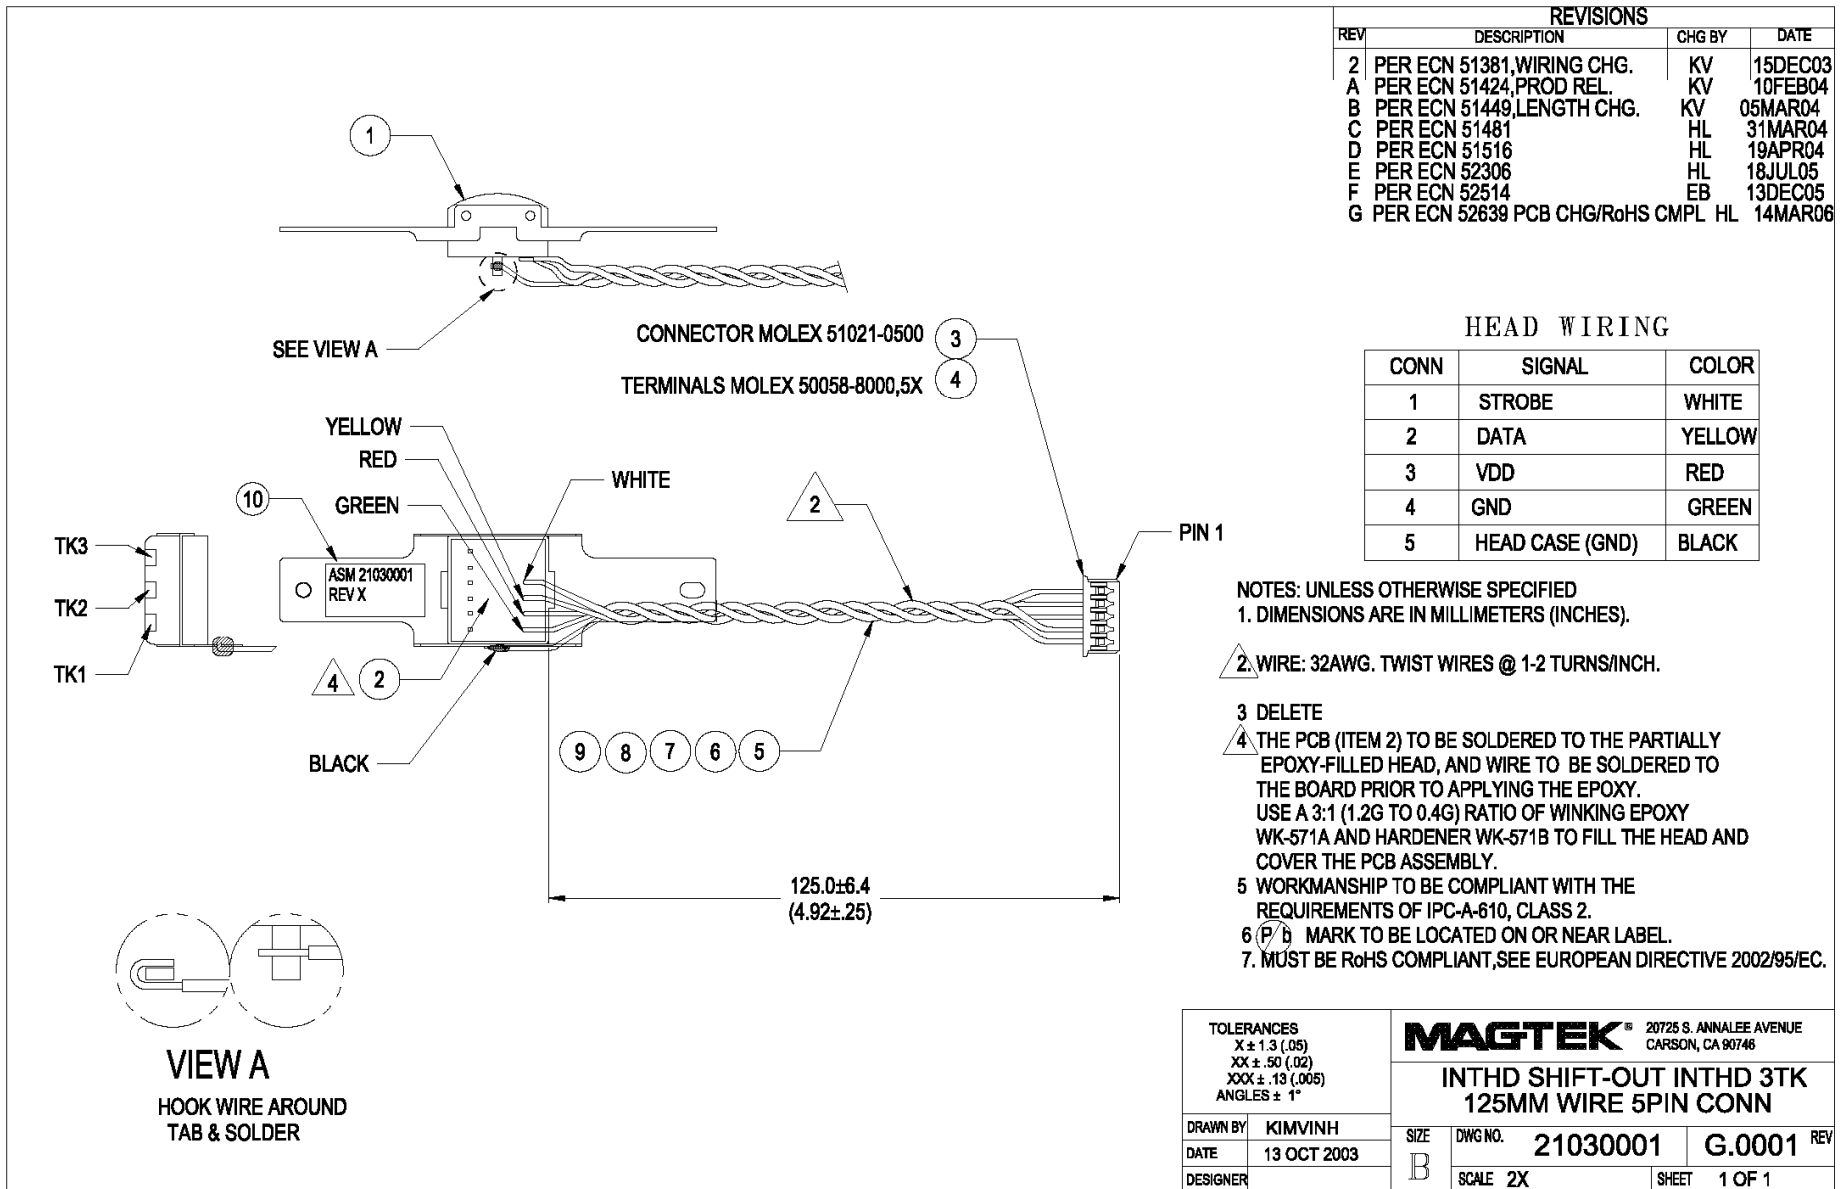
Three-Track 3V Shift-Out IntelliHead, Butterfly Spring
